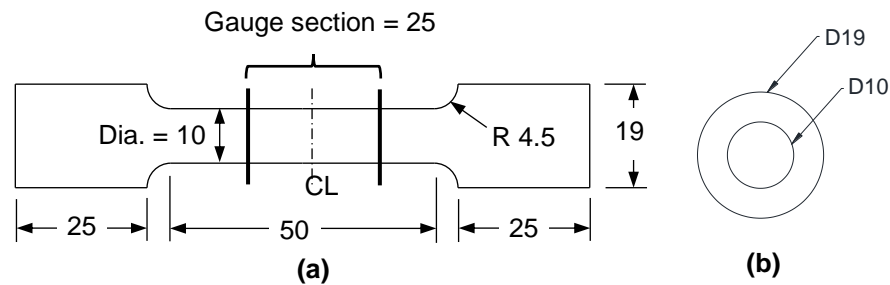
Geometric details of a typical cylindrical test specimen's (a) gauge section, and (b) cross-section. (all dimensions are in mm.).
